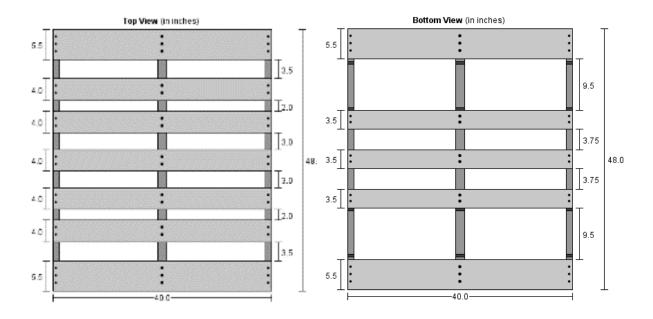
48"x40", Stringer-Class, Double Face Non-reversible, partial-four way, multiple use pallet.
